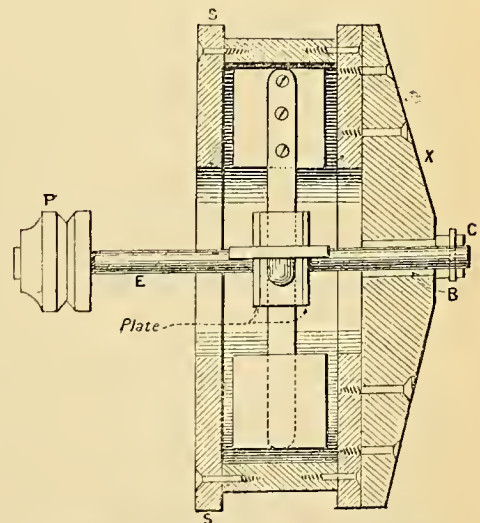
SECTION OF BLAST FAN THROUGH SPINDLE.
